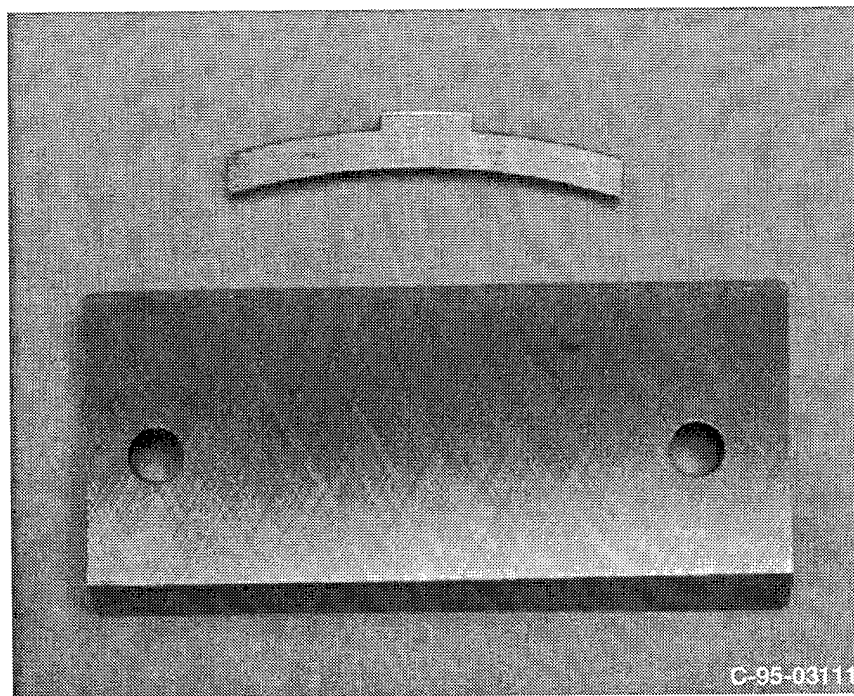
Chrome coated ring and cast iron liner test specimens.
